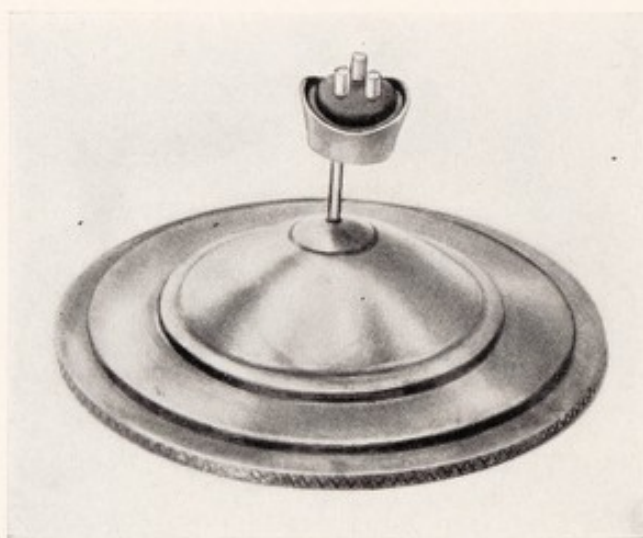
Band, wax and post assembly mounted on sprue preparatory to investing
